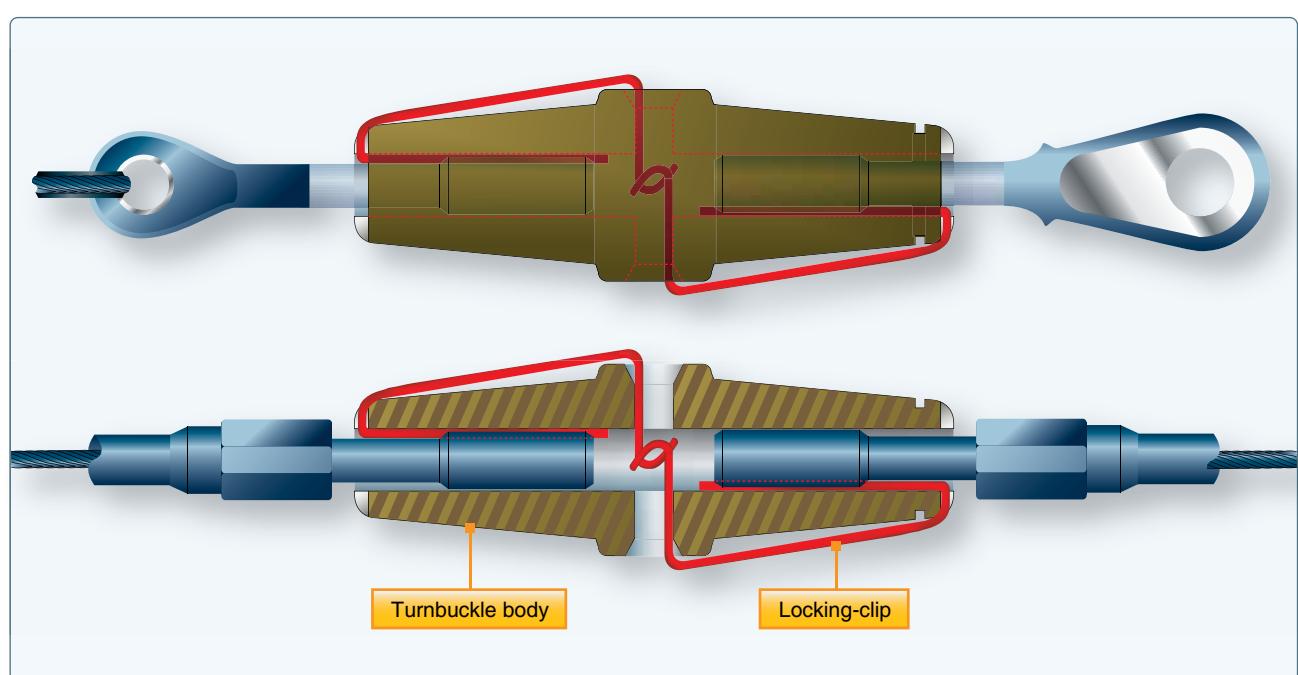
Clip-type locking device and assembling in turnbuckle.
